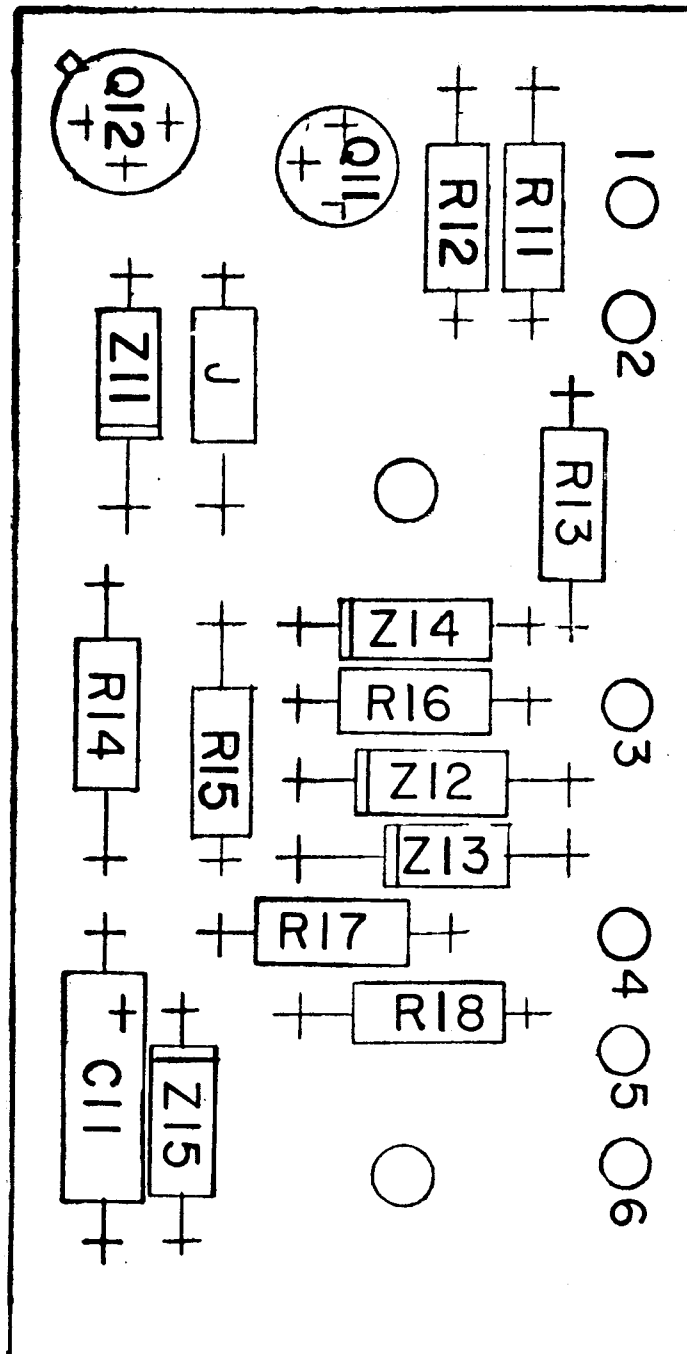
Component Locations on the Transmitter Printed Circuit Board.
